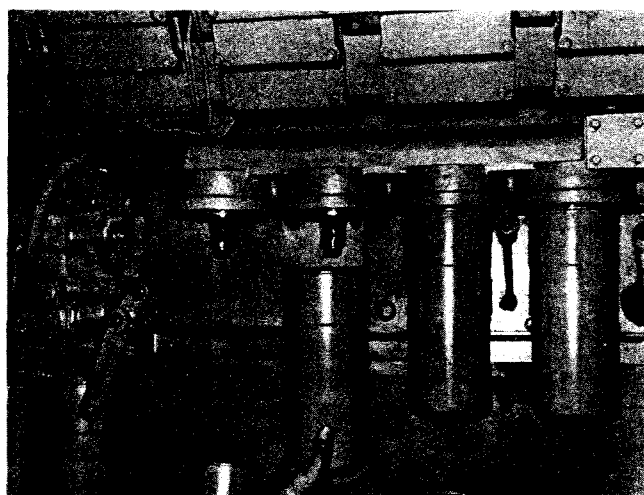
, (K21907). Installing "spin-on" lubricating oil filter — KT(A)-2300 Engine
